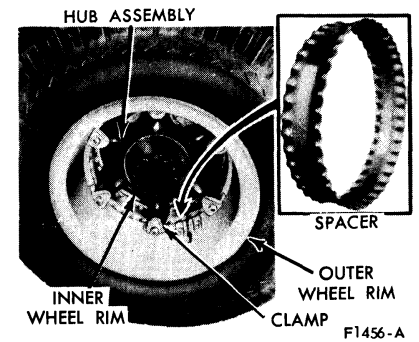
Three-Piece Rim Installed on Cast Wheel
